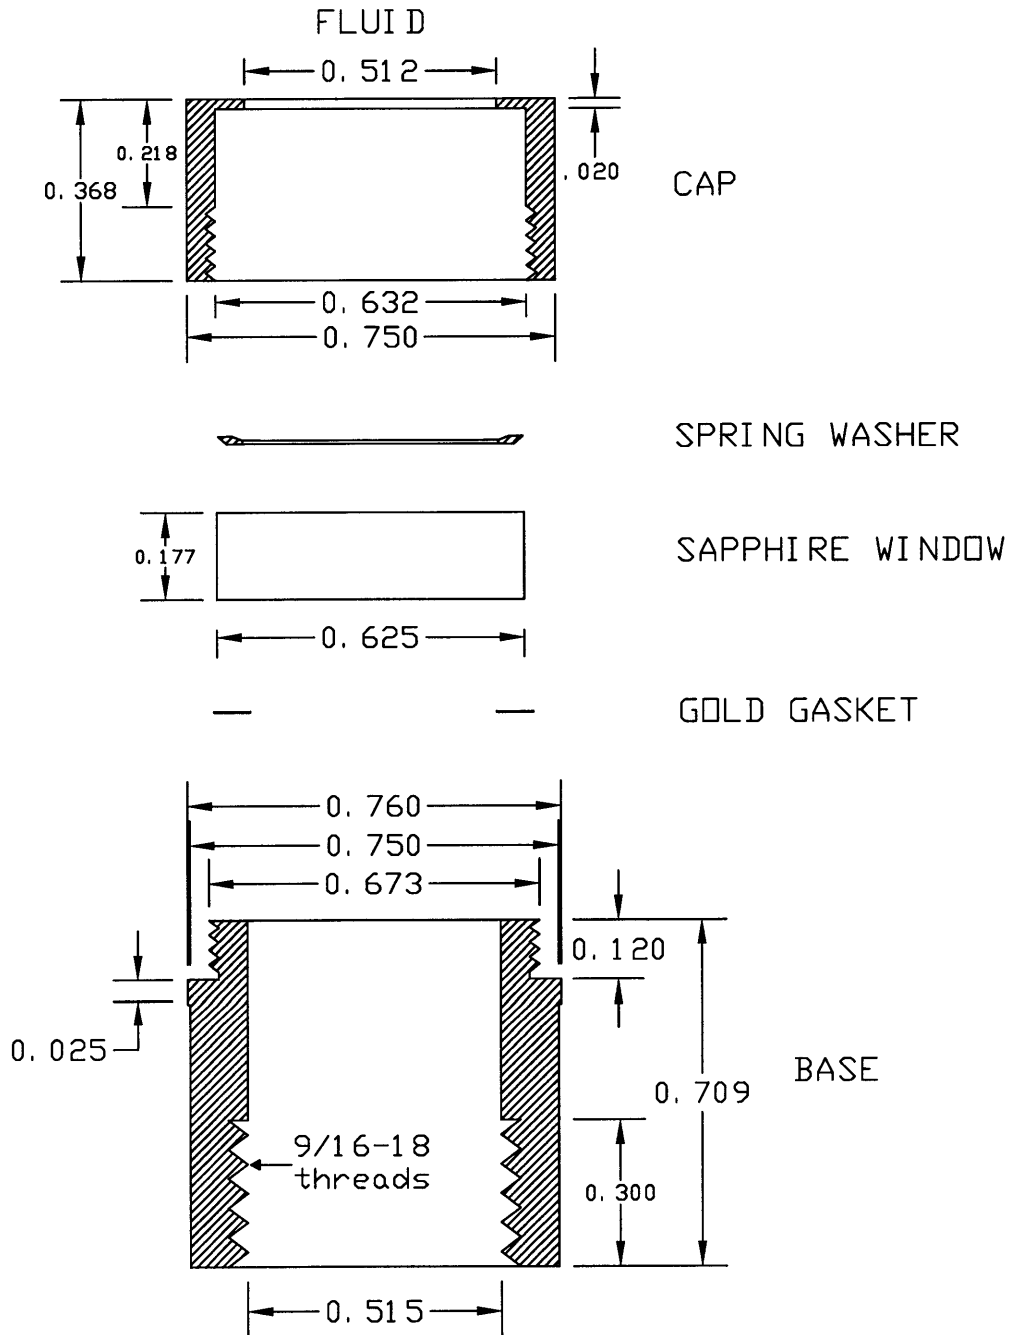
Exploded assembly drawing of the sapphire window system. The base and cap are machined from stainless steel 316. The drawing is to scale except for the gold gasket and spring washer.
